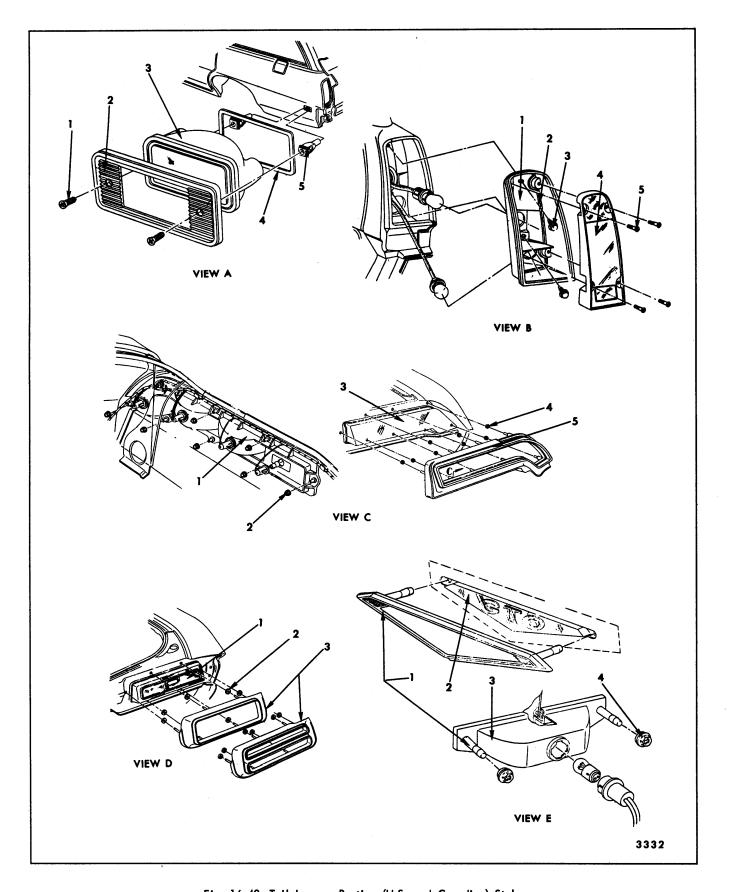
Tail Lamp - Pontiac (U.S. and Canadian) Styles
